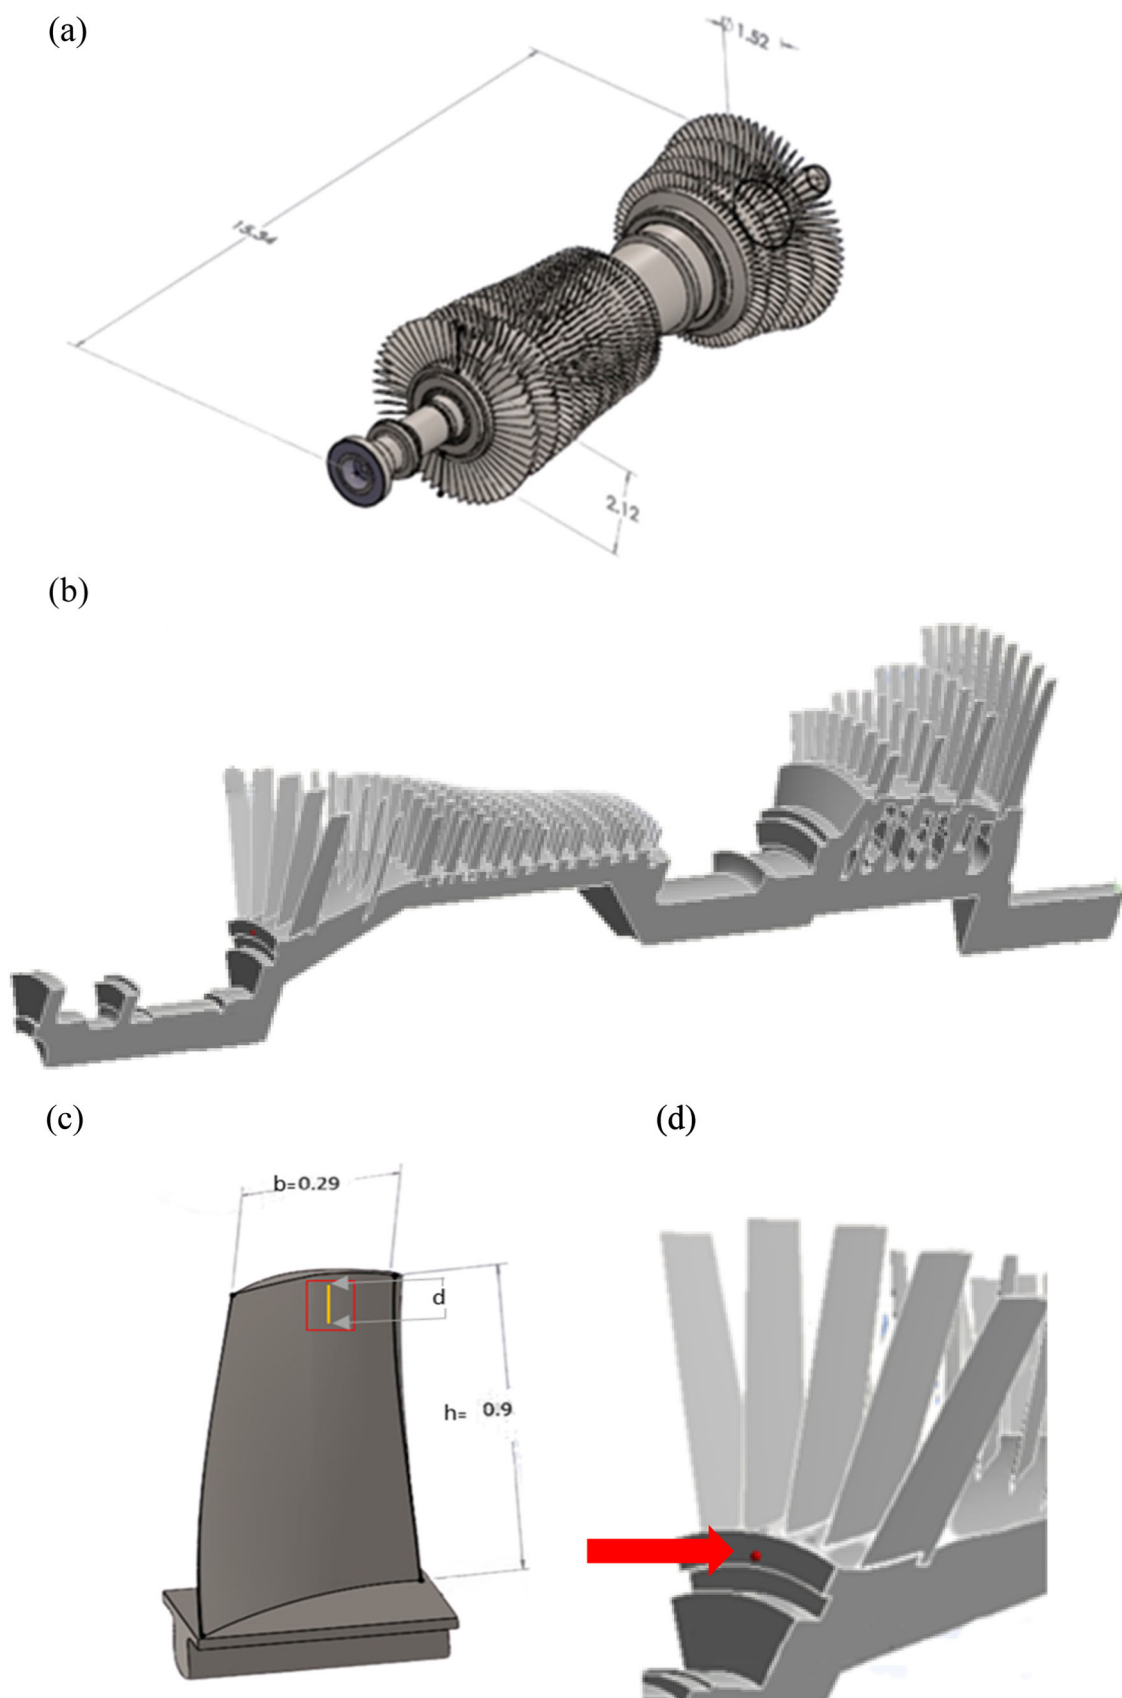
| The developed gas turbine model: (a) complete rotor model with dimensions; (b) 1/8th section of rotor model; (c) blade and crack dimensions; (d) closeup view of model with unbalance mass location (shown as red dot).
